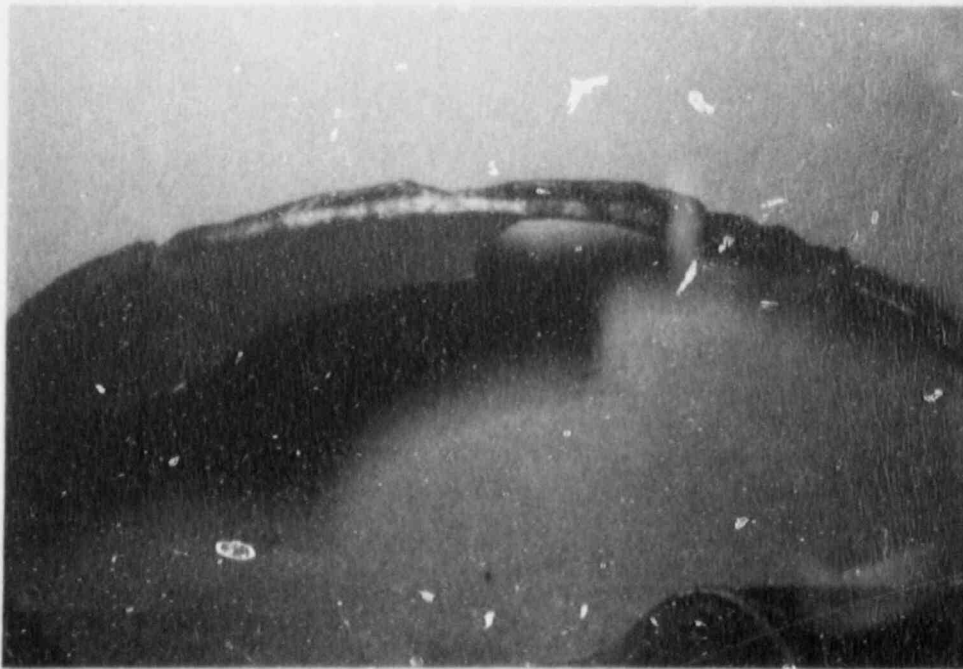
Close-up photograph of the weld area adjacent to the failure.
